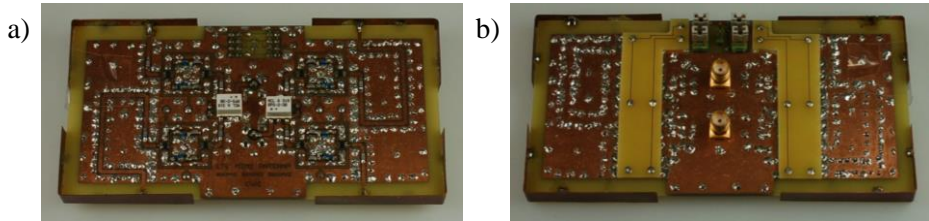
Fabricated prototype in top view a) and bottom view b).
